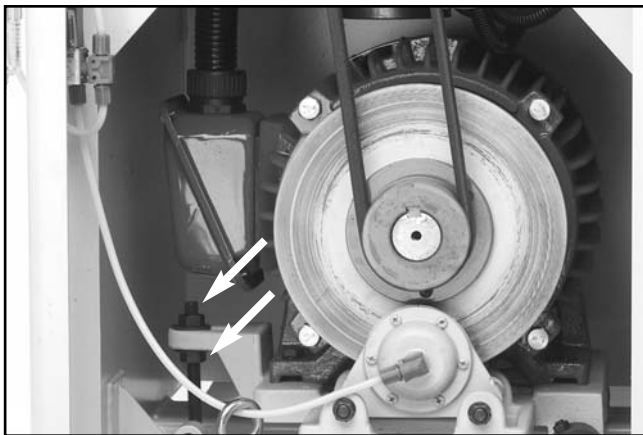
Turning these nuts allows you to raise/lower the motor to adjust the V-belts.
